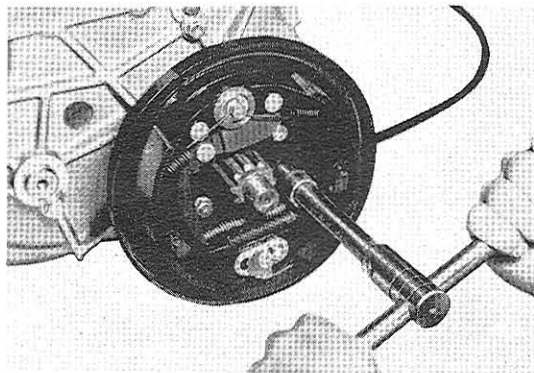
Removing Parking V0448 Brake Plate Assembly
